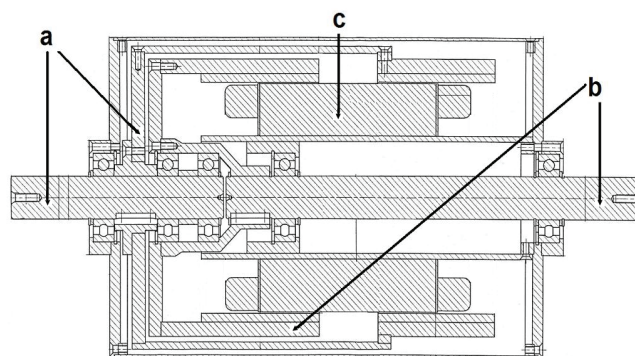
The prototype of electromagnetic torque converter, a) generator, b) motor, c) common armature
